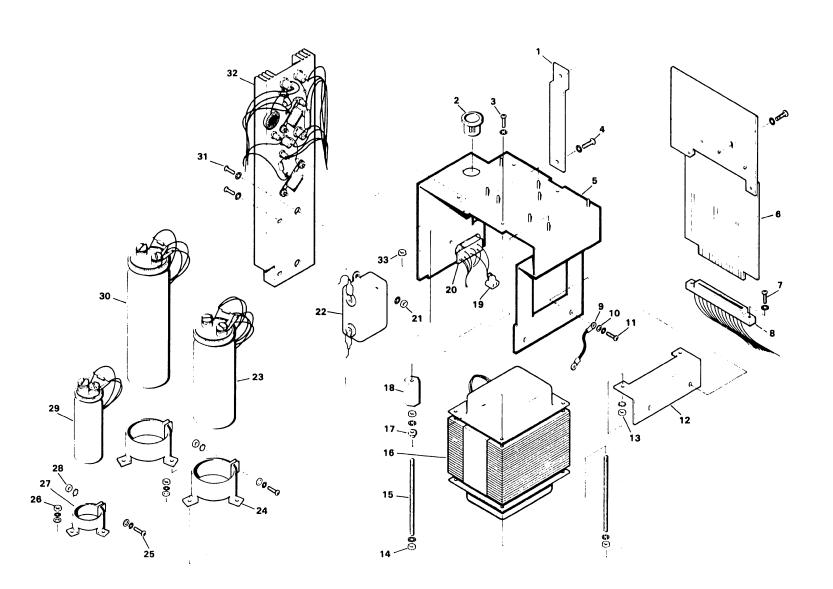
POWER SUPPLY ASSEMBLY (ASSEMBLY PART NO. 279-0526) or 270-0879 (FCC)
